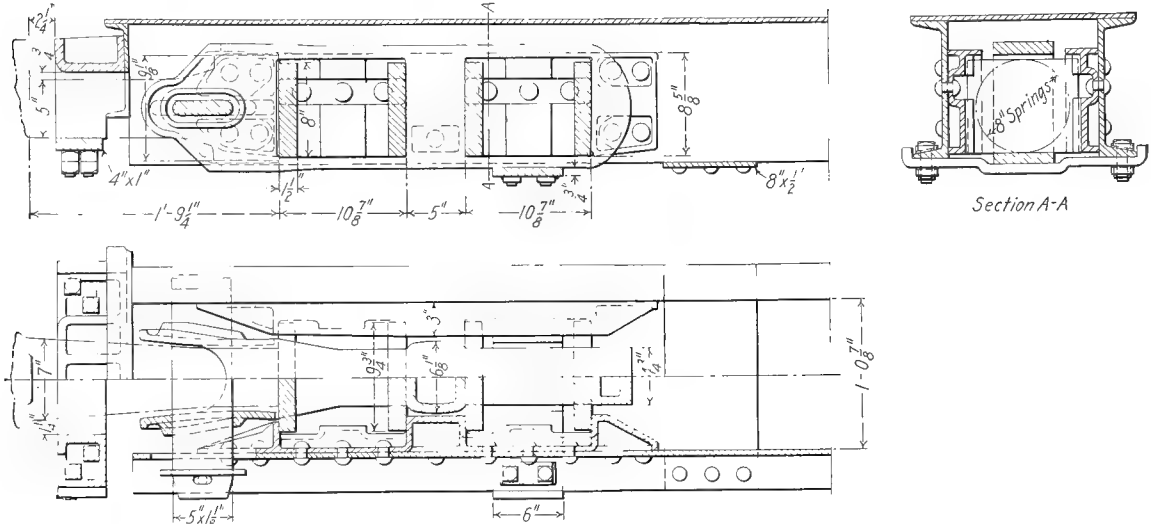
General Application to Steel Underframes of Universal Tandem Keyed Yoke and Attachments Used with Class G Springs. Universal Draft Gear Attachment Company.
